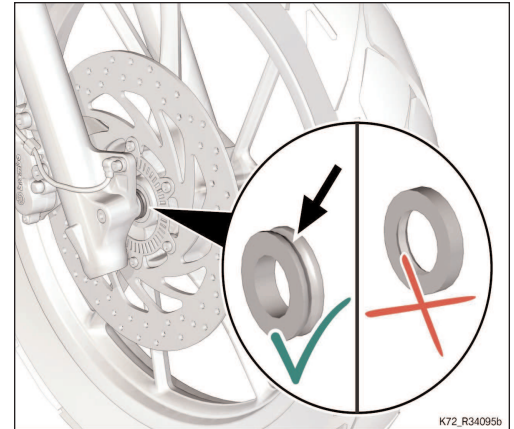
New, thinner spacing bushing with circumferential groove (left), old spacing bushing (right)
